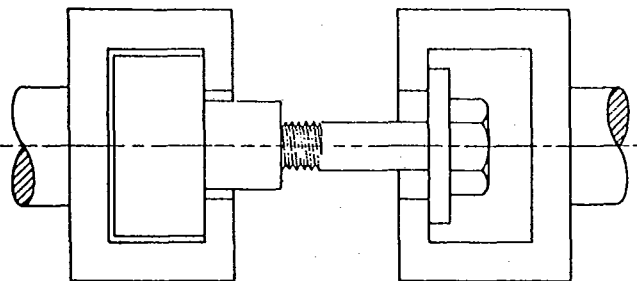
TENSILE TESTING OF FULL SIZE BOLT OR SCREW
